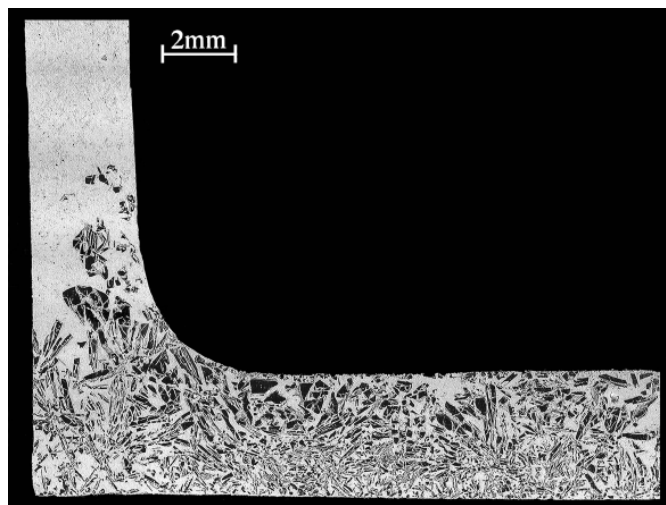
Micrographs showing the morphology in the cross section of extruded cup under the condition of 580 °C and 500 mm/min using a screw driven universal tension-compression machine.
